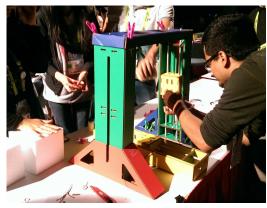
A 3-axis hot wire cutter for cutting foam. Many hot wire cutters were produced, including 4- and 5-axis ones such as the first machine in Figure 1. Hot wire cutters are a very easy way to rapidly prototype complex shapes out of foam, which perhaps explains their popularity.
